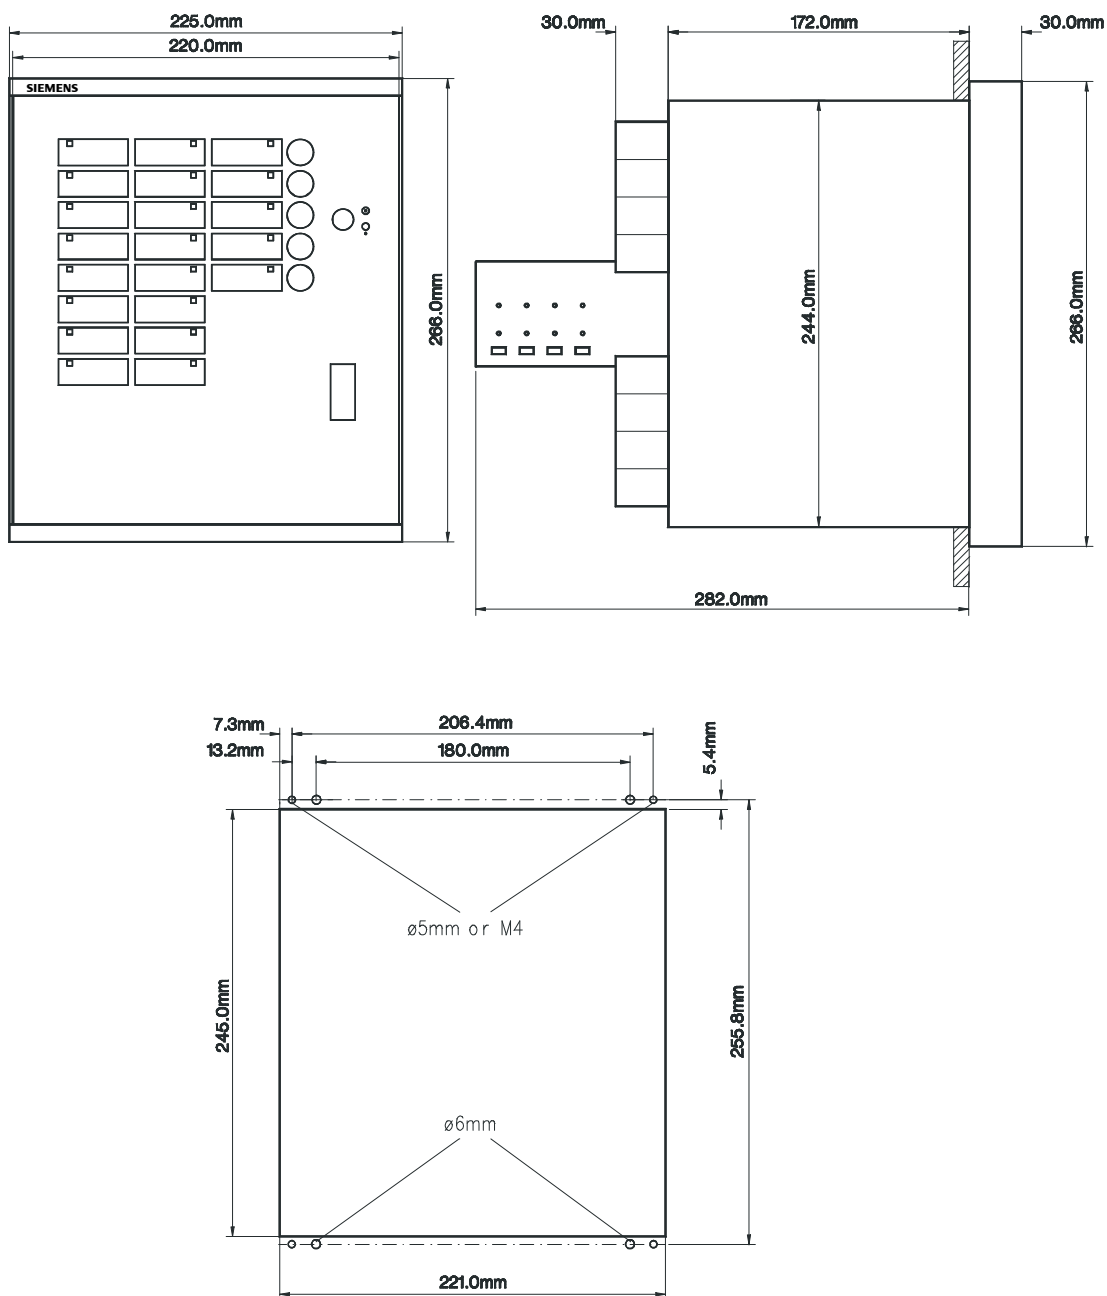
Dimensional drawing, panel flush mounting; ZE 8/16
